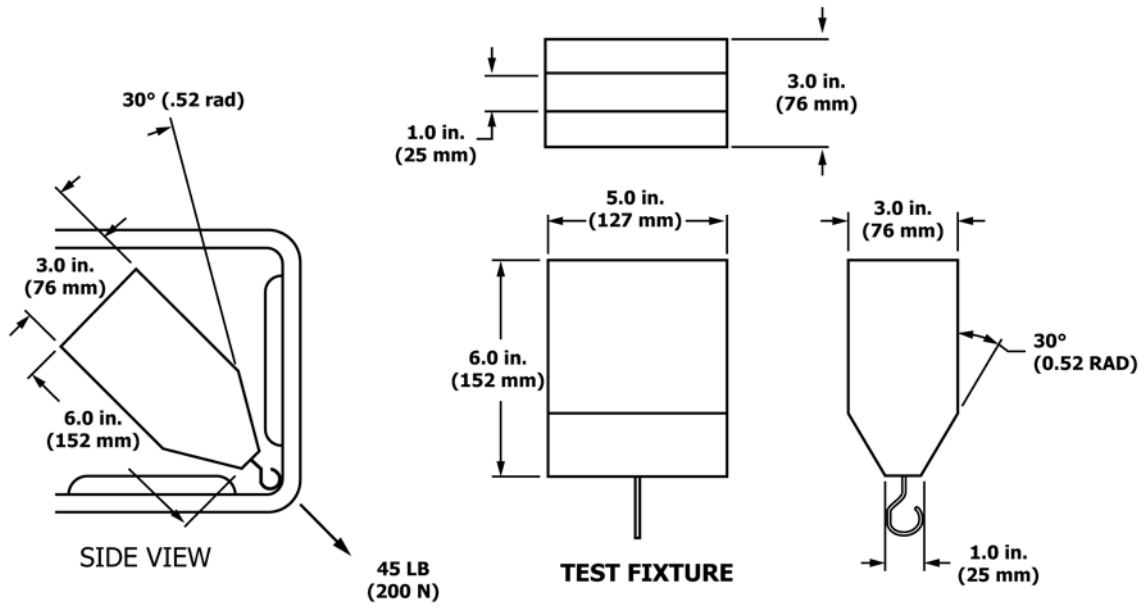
Test Fixture for Multiple-Occupancy Swings
